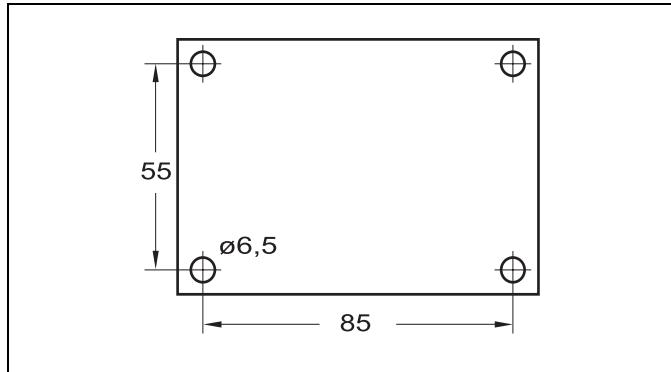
Hole pattern for the stand for the U 4814 circulating pump
